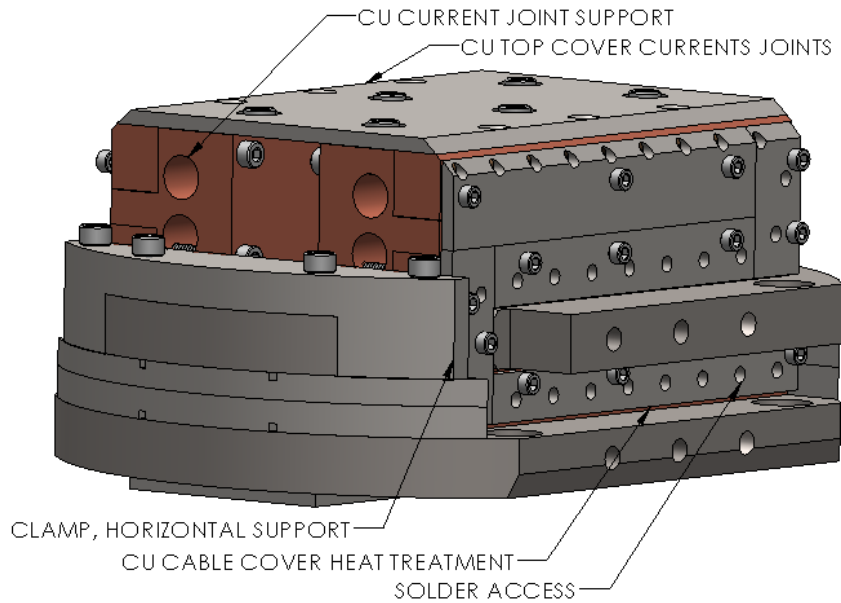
Cable assembly as it should appear before heat treatment.
